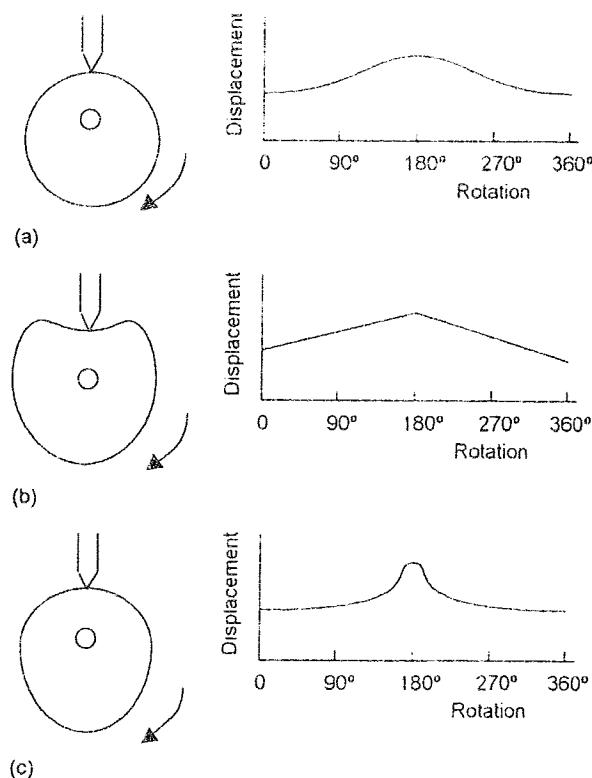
Cams: (a) eccentric, (b) heart-shaped, (c) pear-shaped
